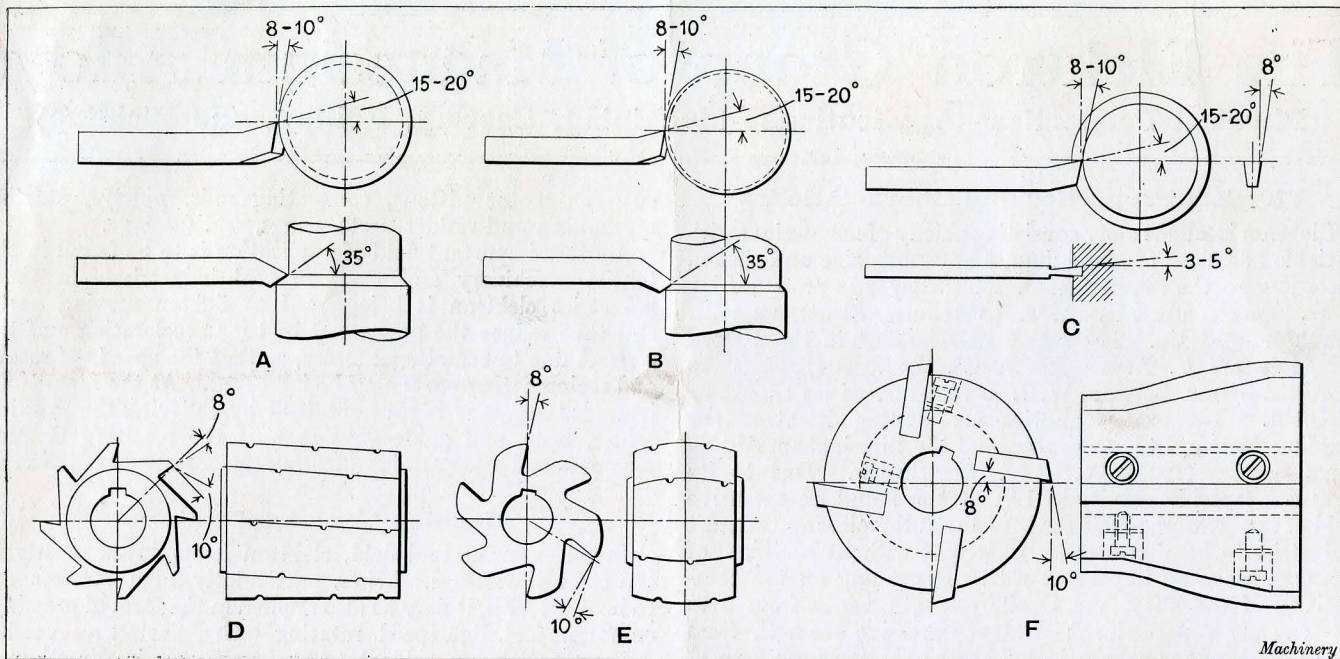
Examples of Turning, Milling, and Drilling Tools for Elektron Alloys. A—Rough Turning Tool. B—Finish Turning Tool. C—Grooving Tool. D—Face Milling Cutter with Notched Teeth. E—Form Cutter with Backed-off Teeth. F—Inserted Tooth Milling Cutter
